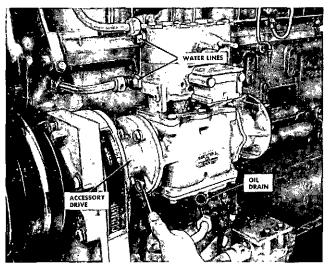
Removing Bendix-Westinghouse Air compressor
